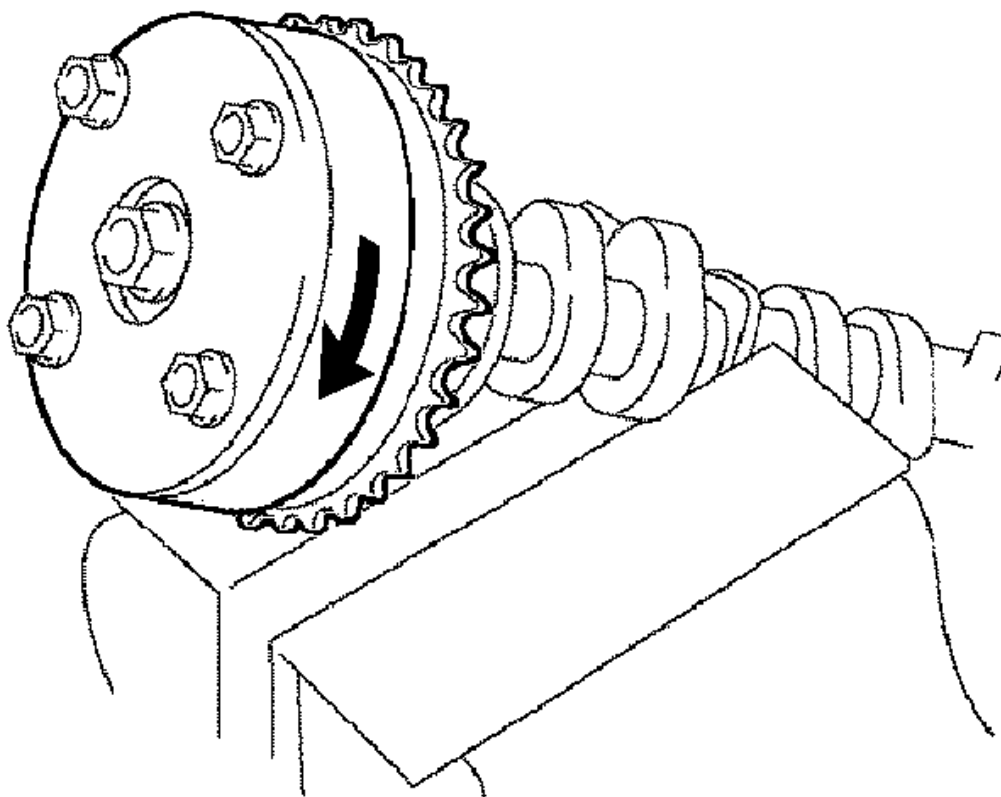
Rotating Camshaft Timing Gear In Retard Direction (Clockwise)
